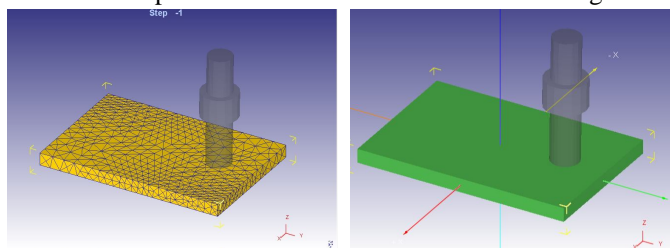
FSW Tool & Plate Mesh & Model of Triangular Pin
